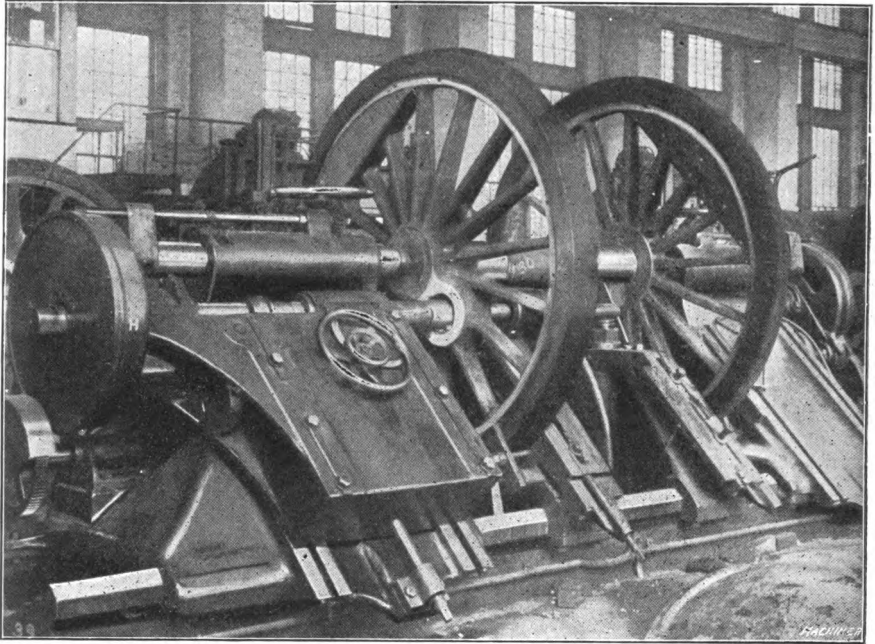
Boring the Crankpin Holes in the Quartering Machine
